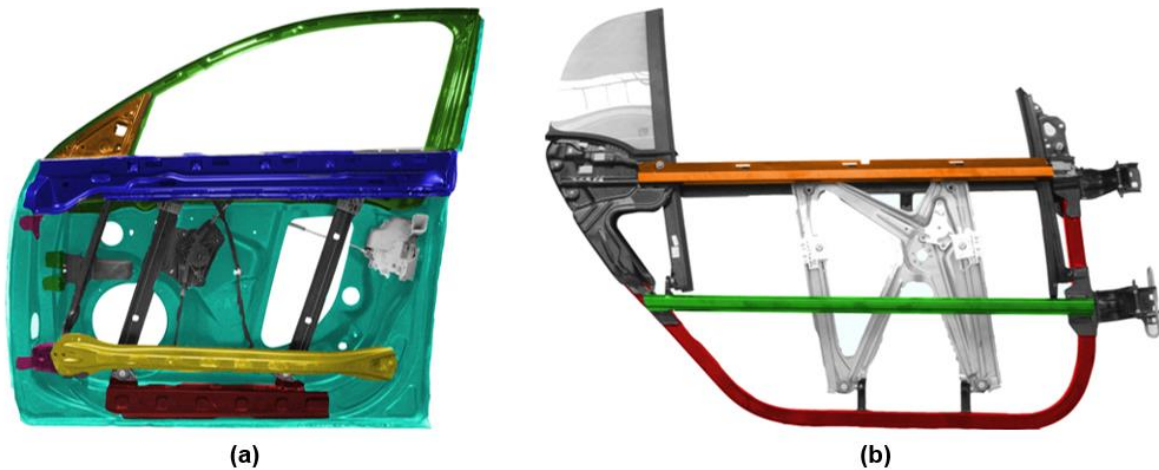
Sheet construction door: Audi A4 (a); Frame construction door: smart 4 two (b) [83]
